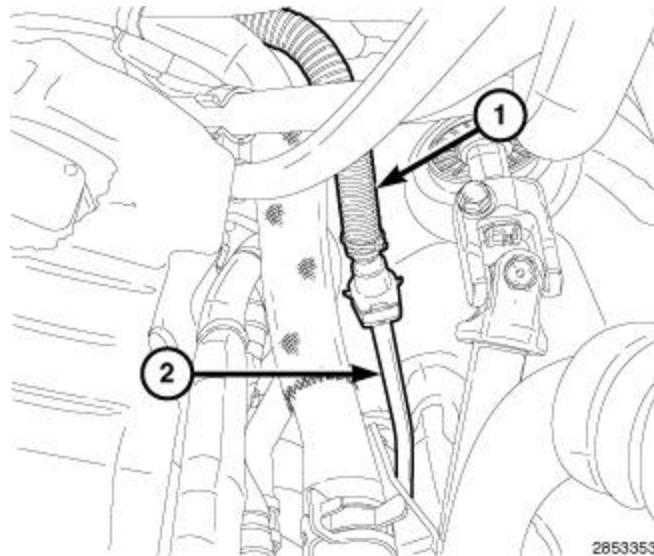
Fuel Supply Hose At Underbody Fuel Supply Tube
